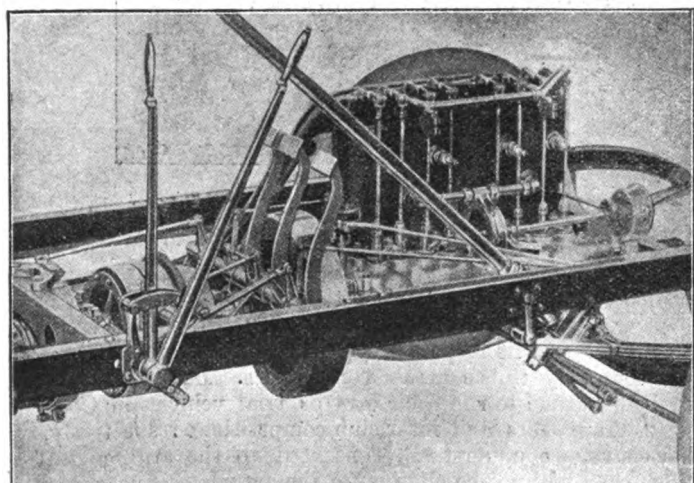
View of Forward Portion of Chassis of the Buick 15-20-h.p. Car.
